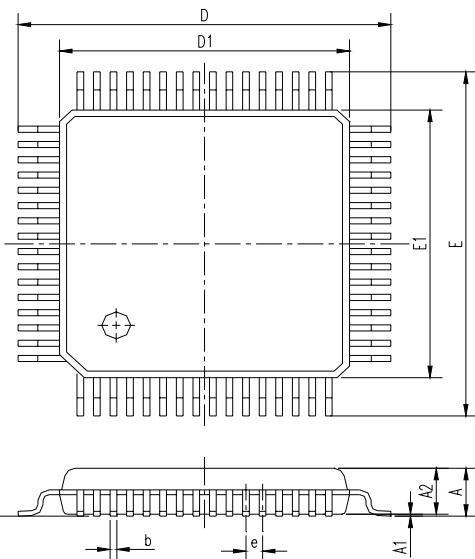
64 Pin LQFP 7.0x7.0x1.4 mm Package Outline Dimension
